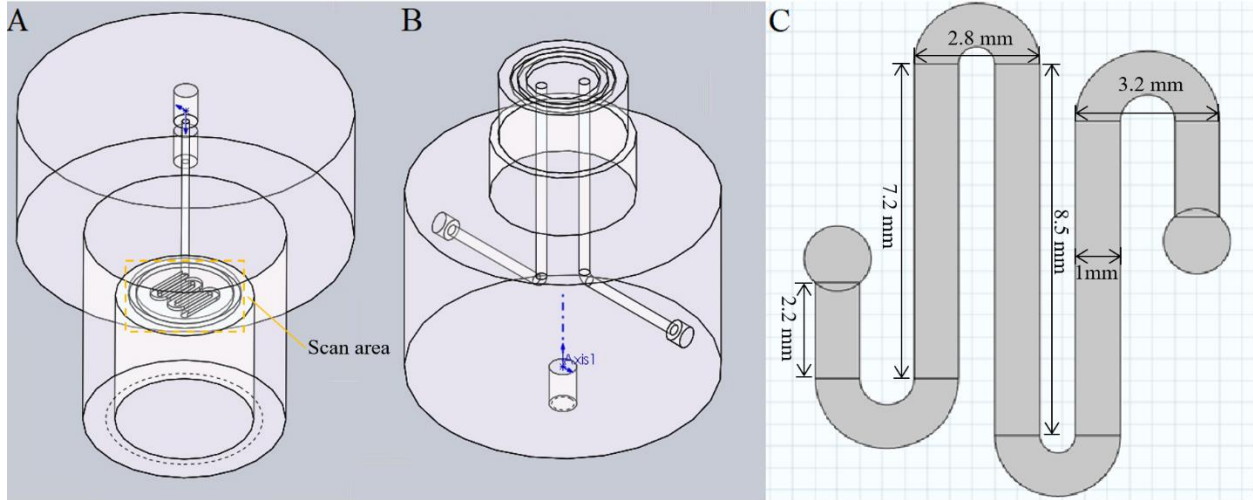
3D schematics of the test cell A) top and B) bottom parts; C) flow channel design with dimension.
